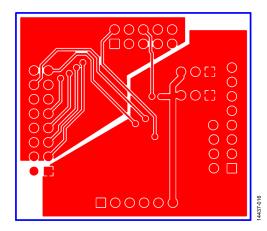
EVAL-AD5344DBZ Daughter Board Bottom Side Routing
